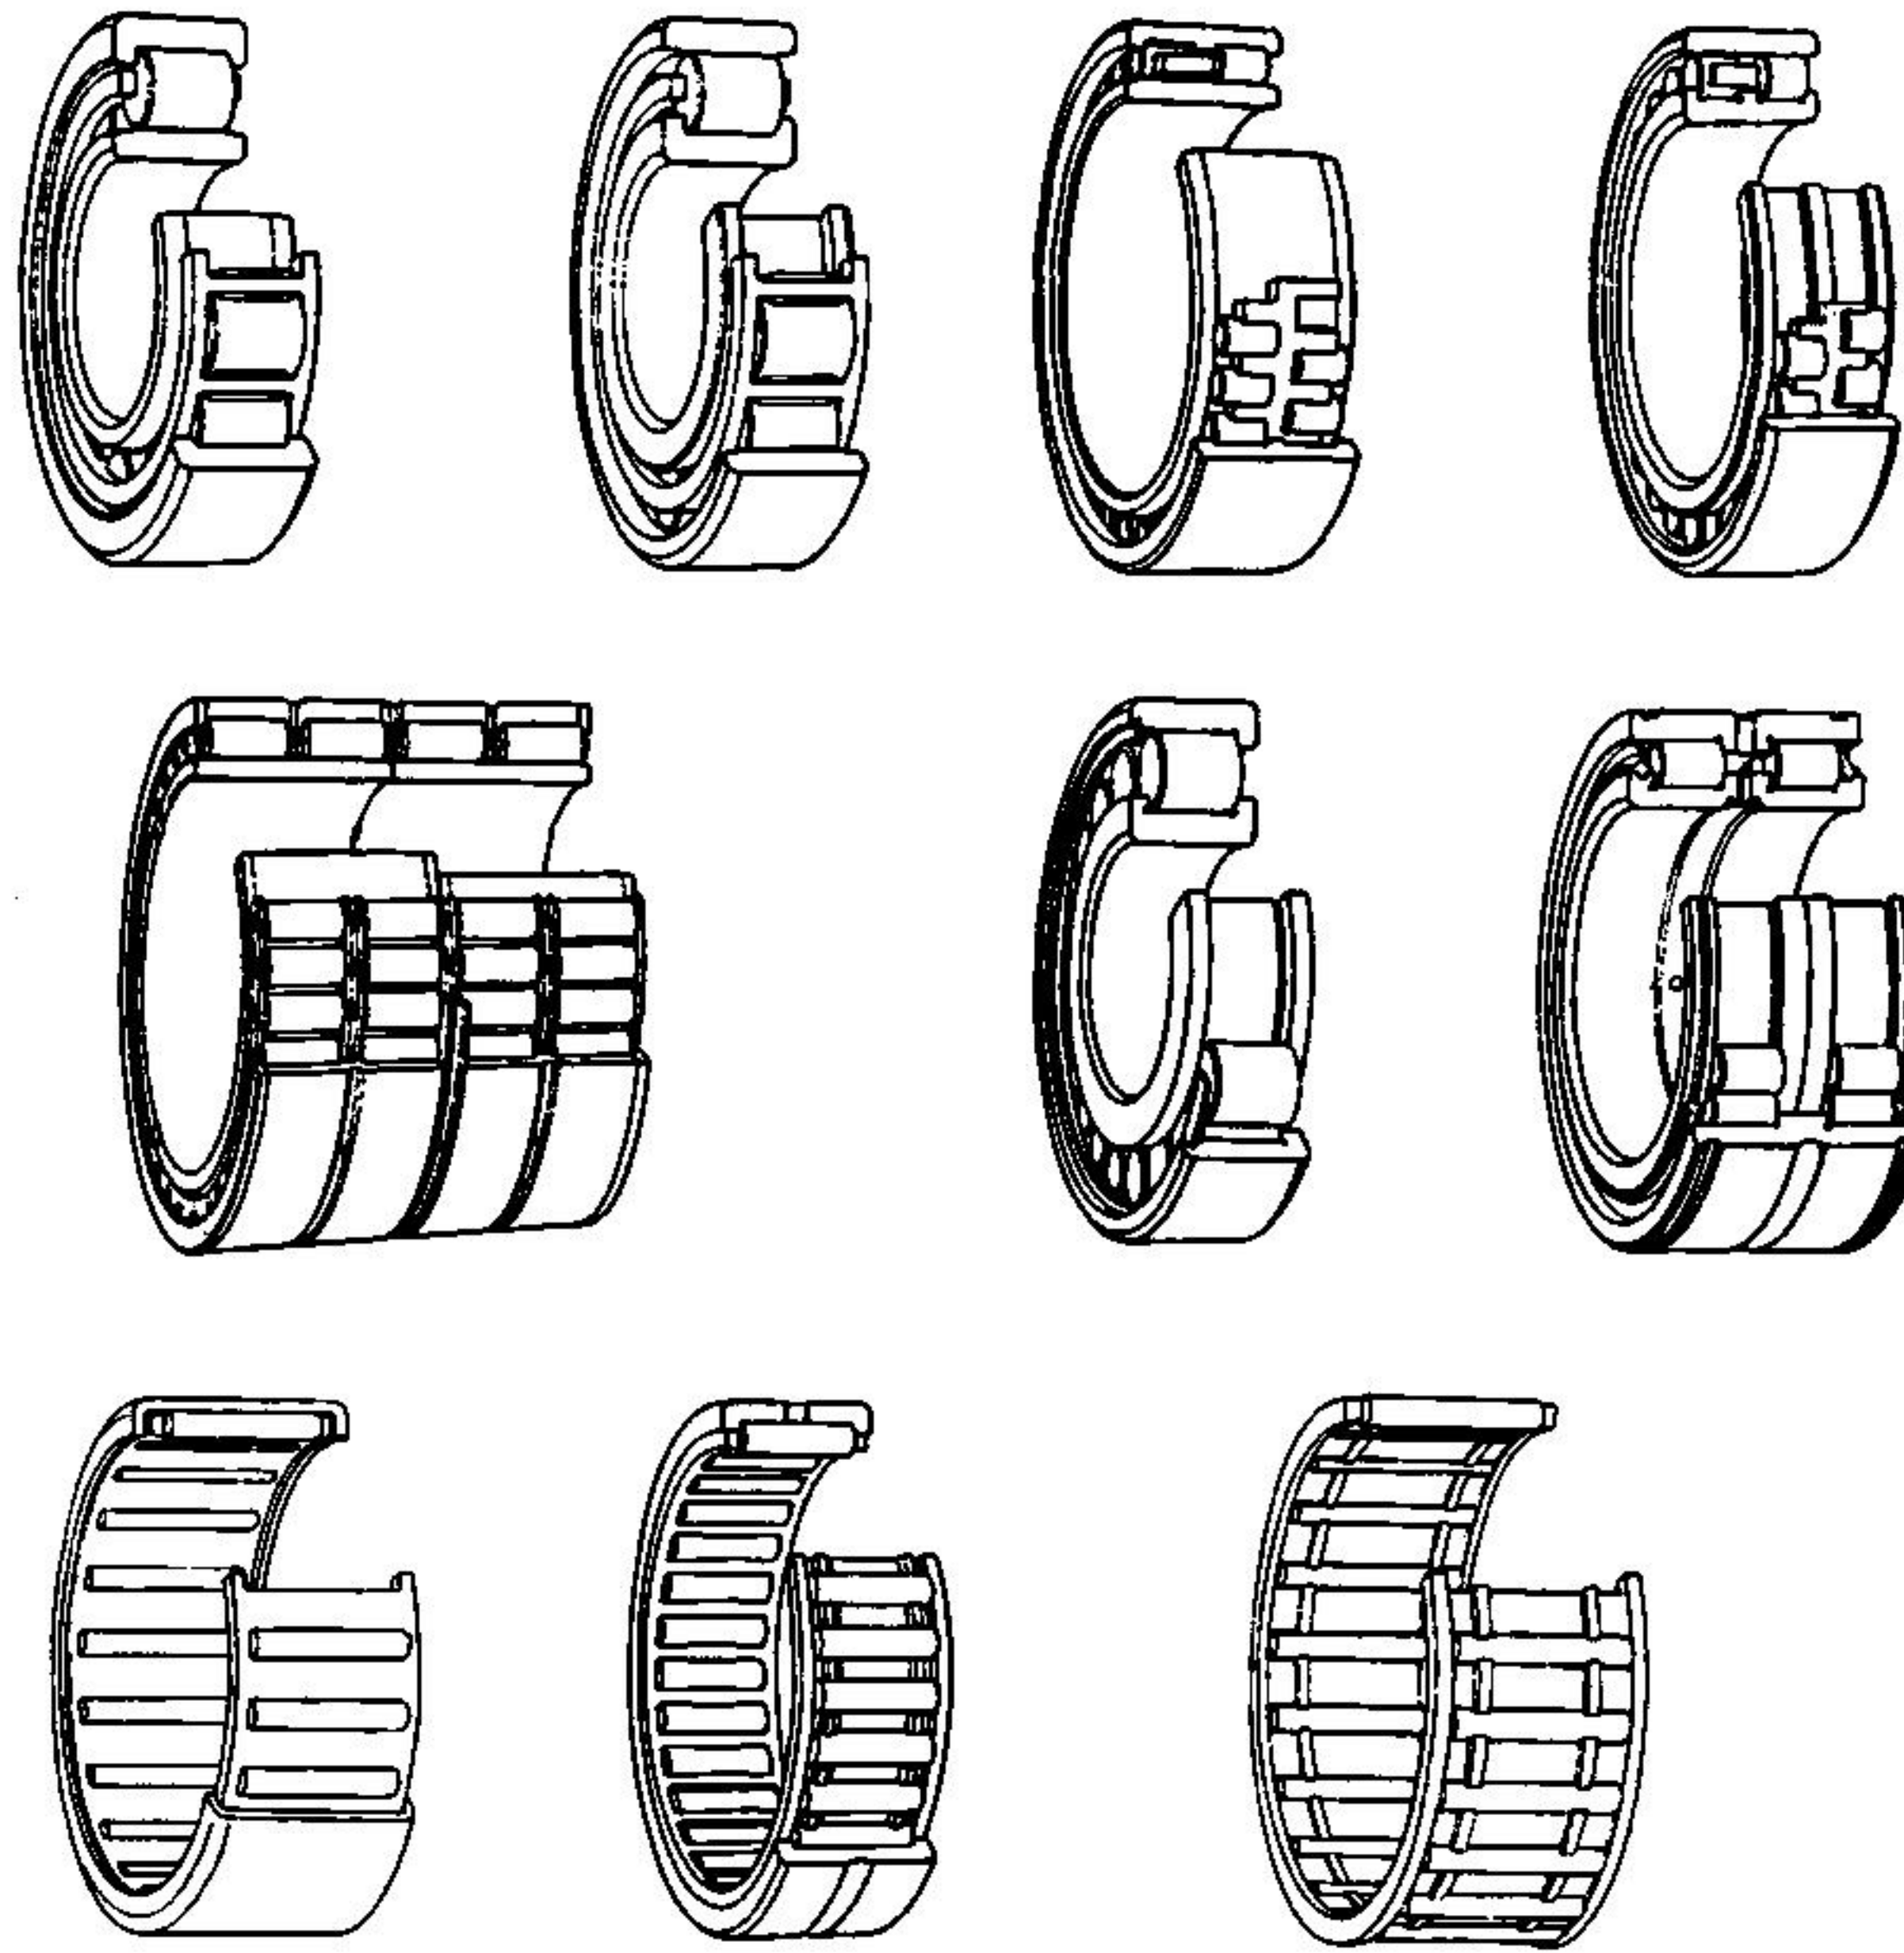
(Continued) (b) Radial roller bearing types.
